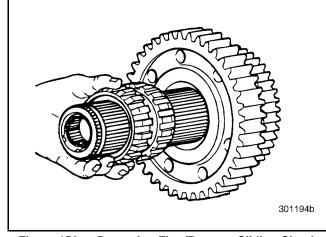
Removing First/Reverse Sliding Clutch from Mainshaft
